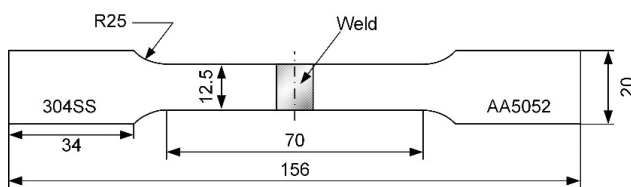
Dimension of tensile specimens for butt joints (unit: mm).
